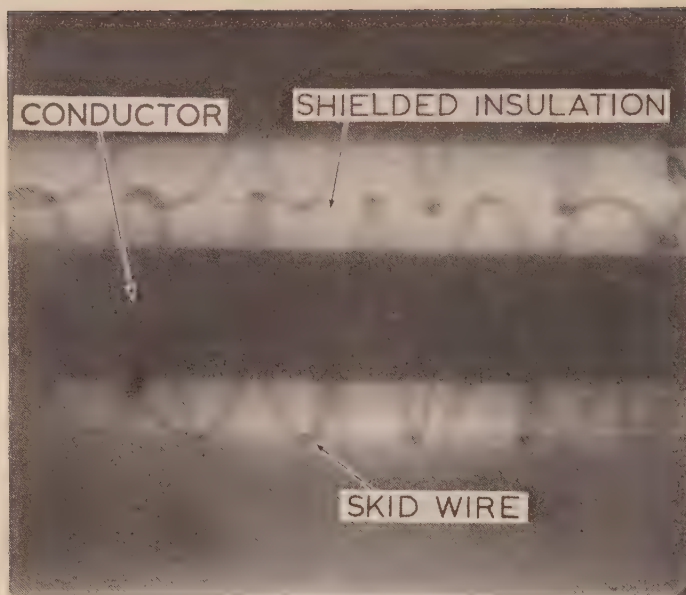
X-ray photograph of undamaged section of 138-kv cable.
